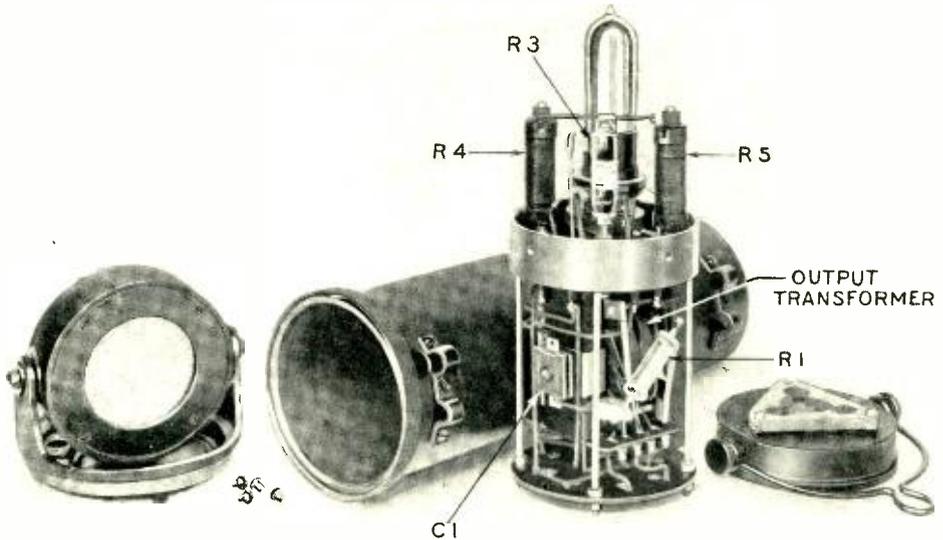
The 47-A Amplifier assembly with the containing shell and the condenser type transmitter
